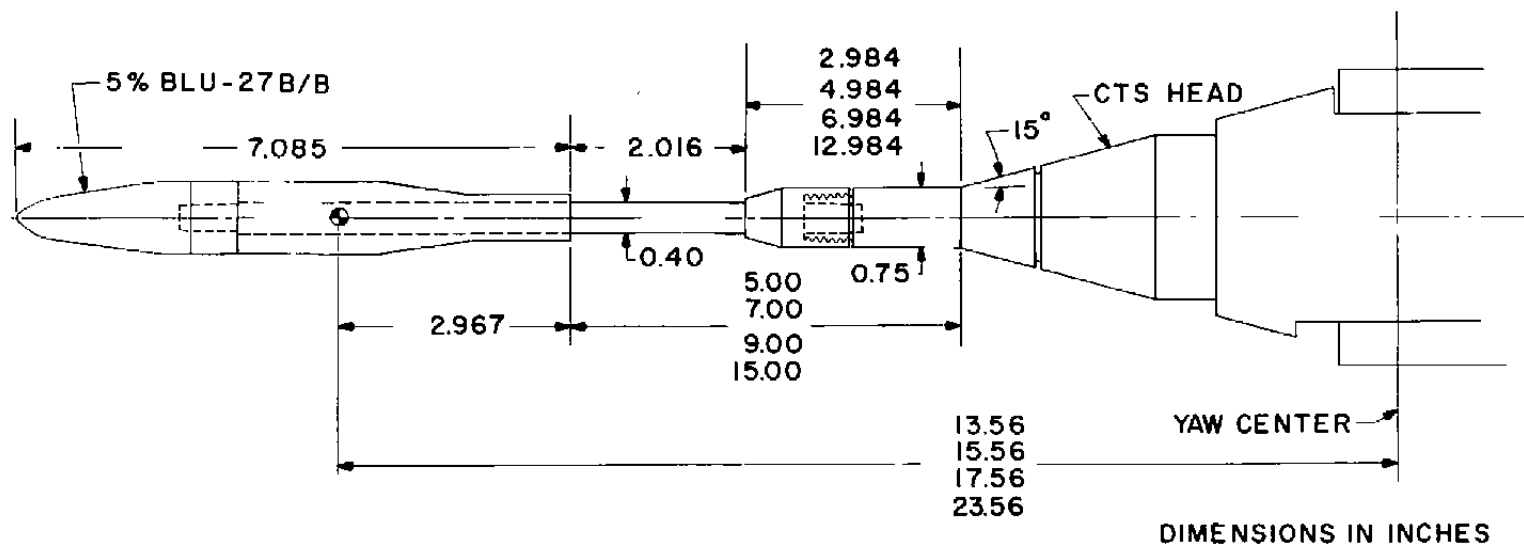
Sketch of unfinned BLU-27B/B installed on CTS sting.
